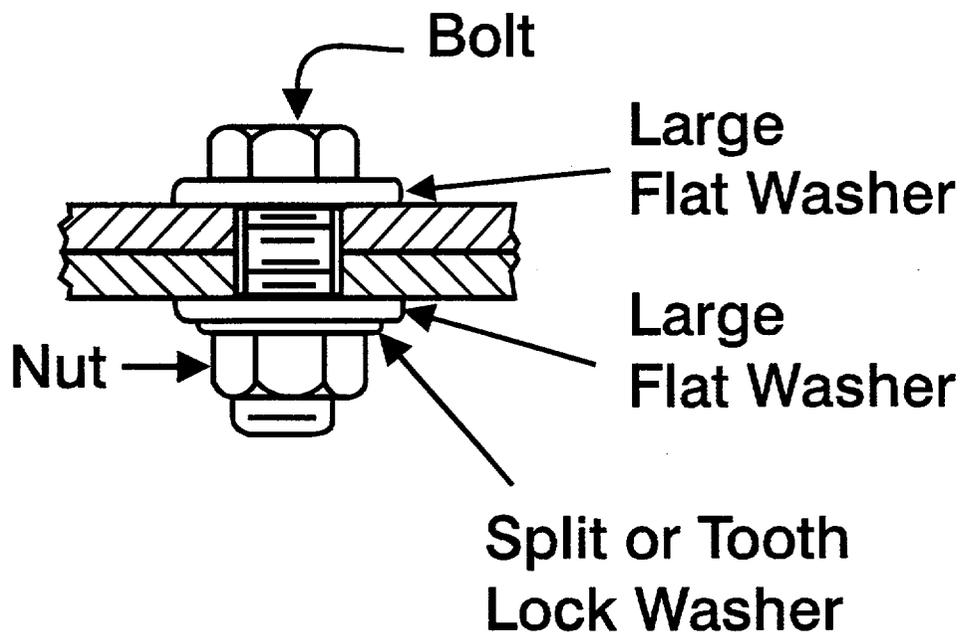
Bolted Electrical Hard Drawn Bus Joint.
